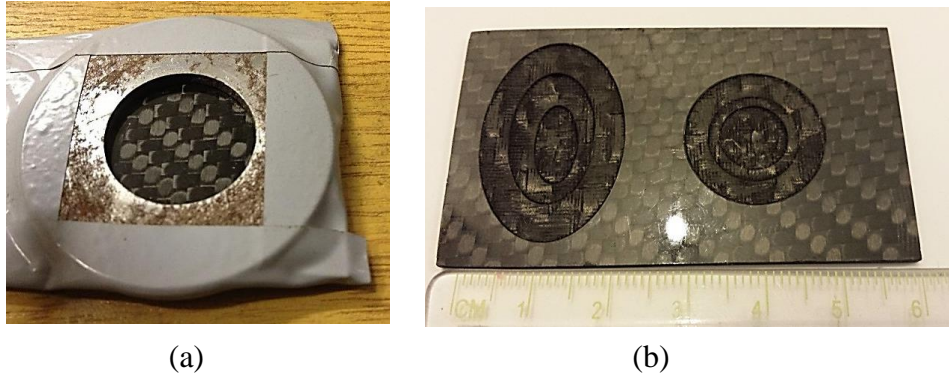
Metal mask technique implementation; (a) metal mask use, (b) the machined sample using the mask.
